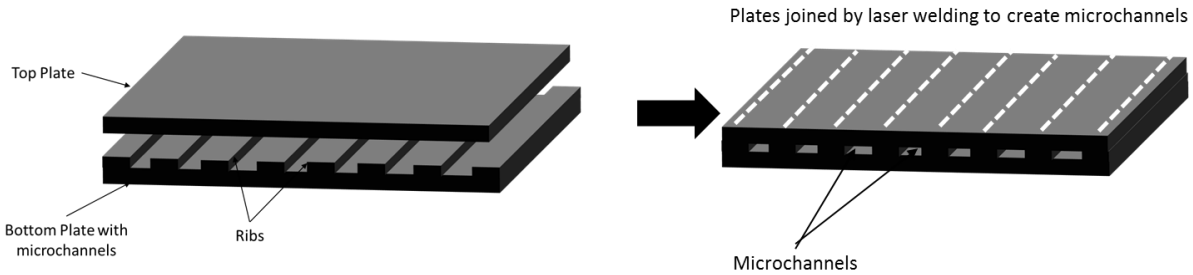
Illustration of manufacturing microchannels using laser welding
